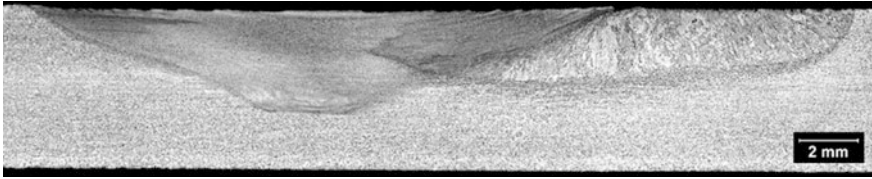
Micrograph of sensitized 304L weldment following FSP of the GTAW HAZ
